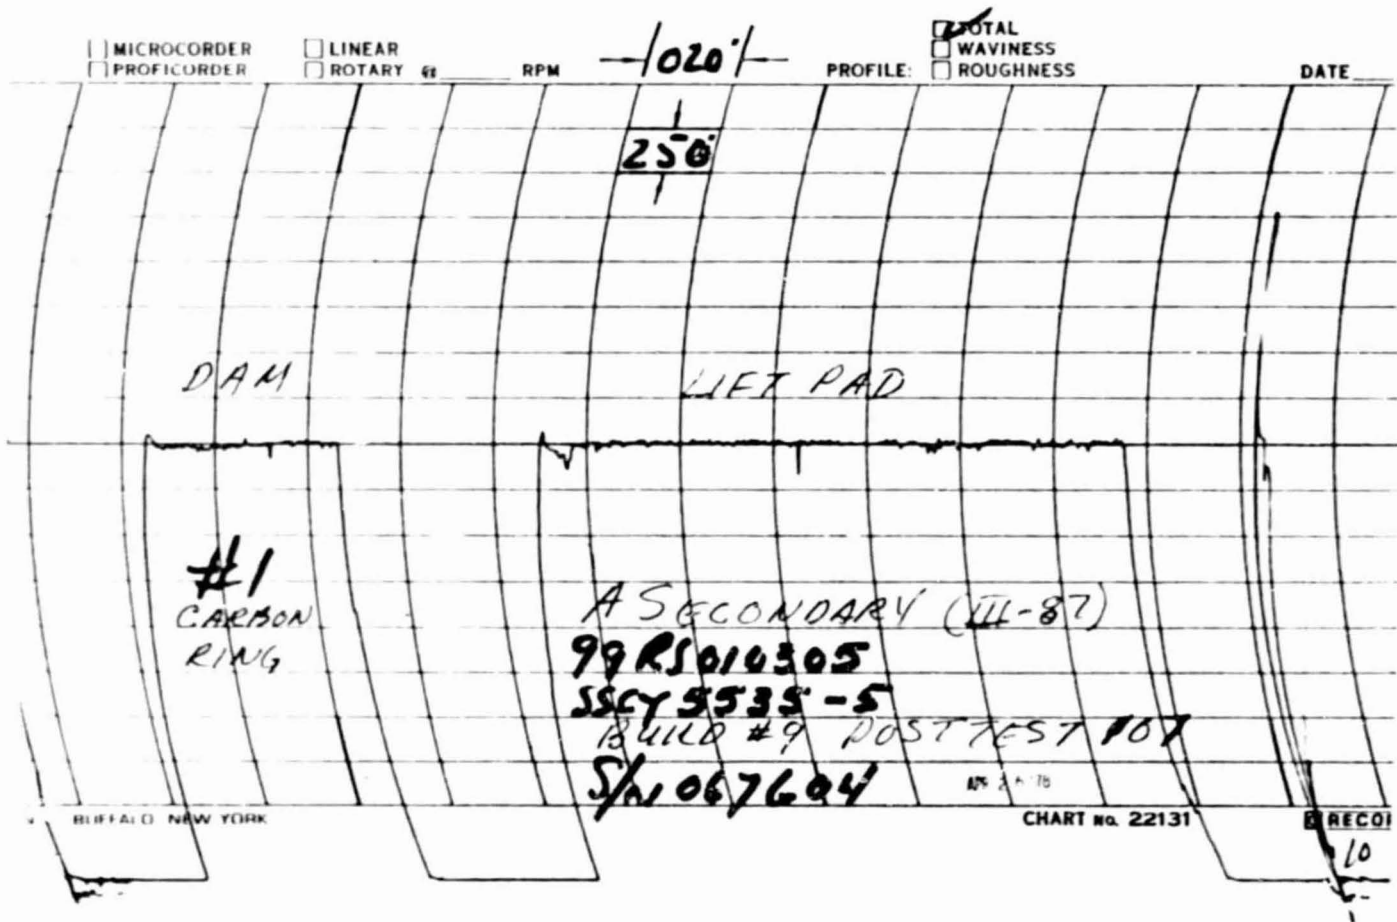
Surface Profile Trace Turbine End Secondary Seal Lift Pad 1, P/N 99RS010305, S/N 04, Build 9, Posttest 107
